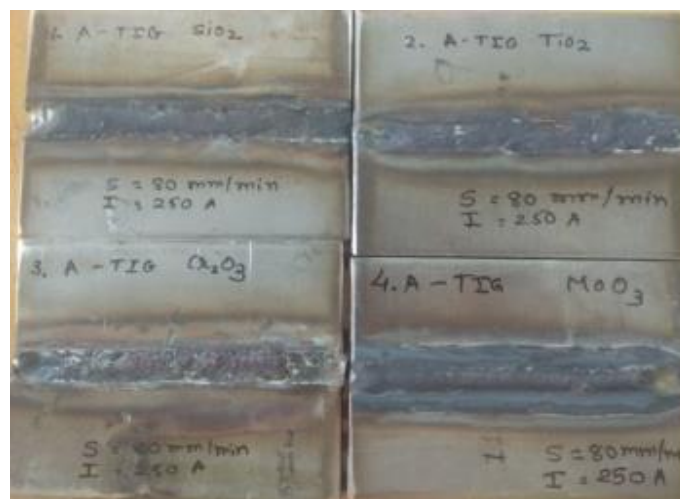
Welding current: 250 A, Torch speed 80 mm/min
